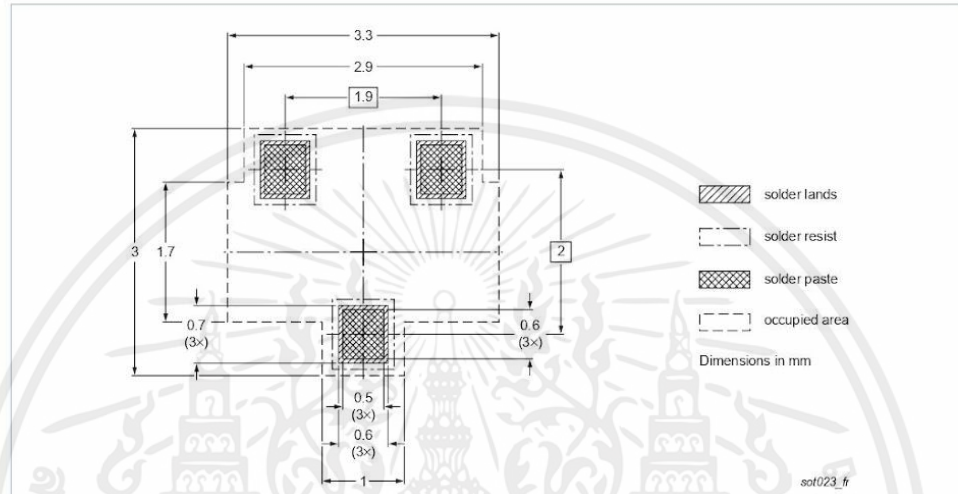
Reflow soldering footprint for SOT23 (TO-236AB)
